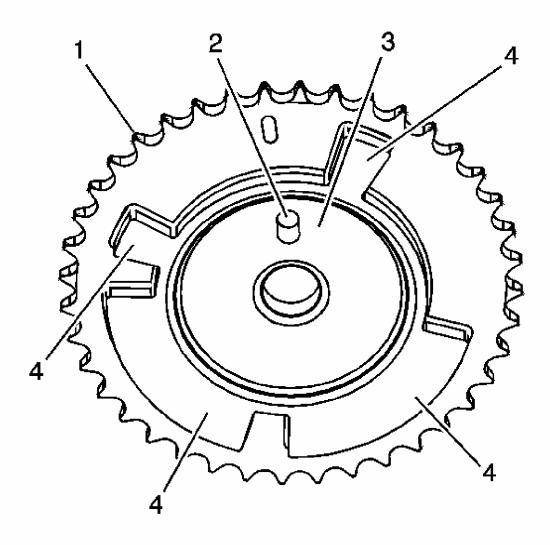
View Of Front Of Right Intake Camshaft Sprocket Courtesy of GENERAL MOTORS CORP.
